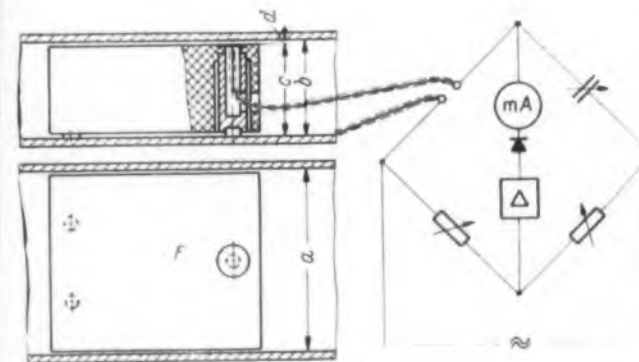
Bridge and movable measuring head for determining inner dimensions of rectangular guide.
